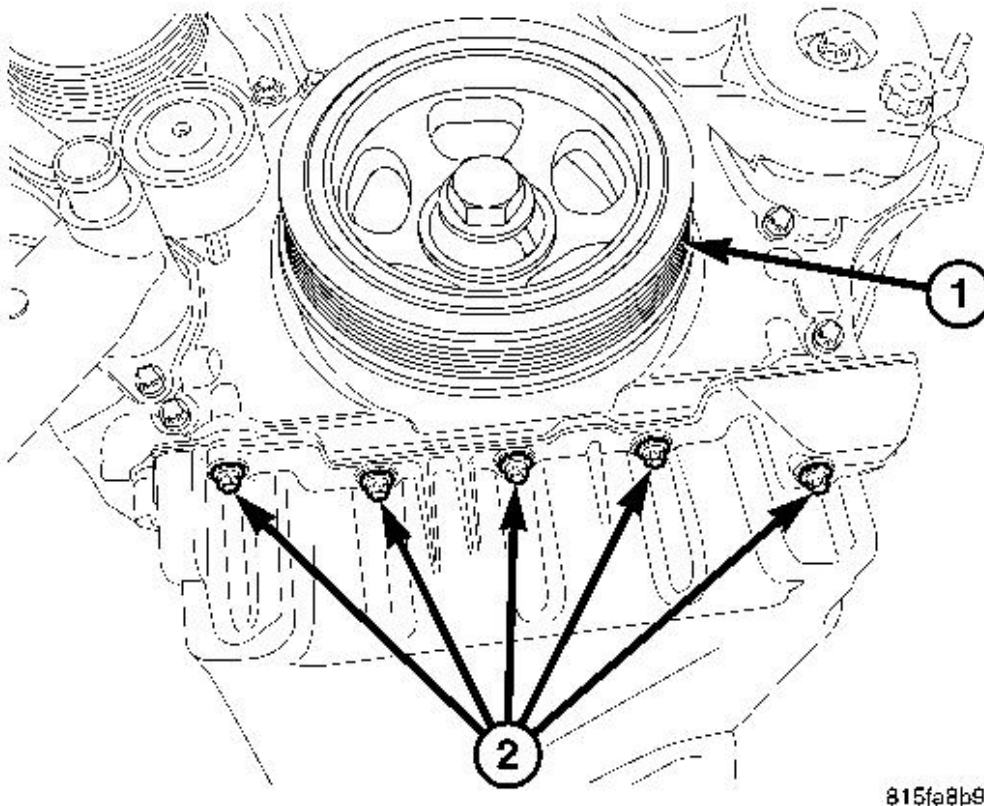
Vibration Damper & Front Oil Pan Bolts
